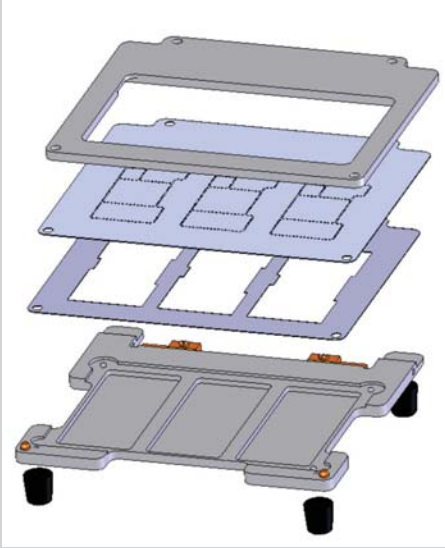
Exploded view of the fixture showing the component stack up for installation.
